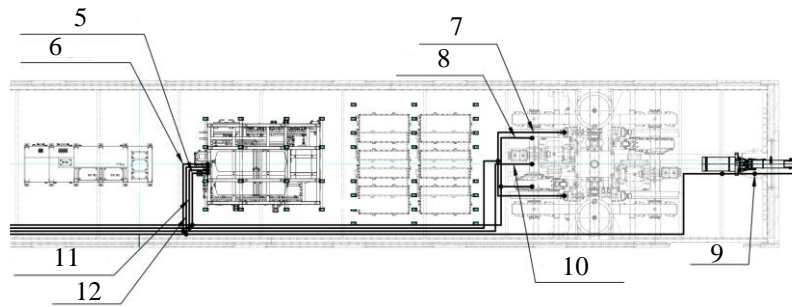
Pneumatic Piping Diagram Design on Trailer Car (top view)
